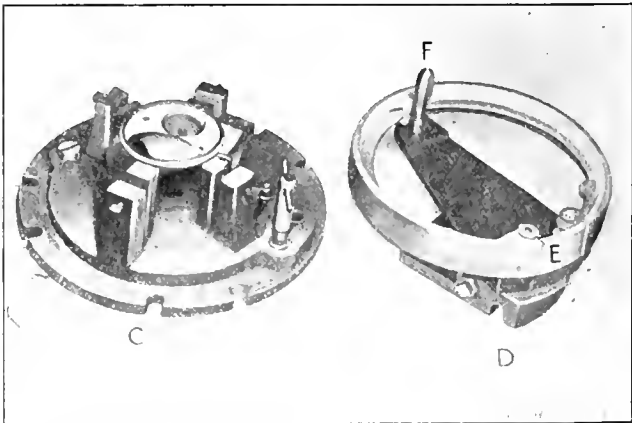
Fixtures used in Surfacing Part of Muffler and Cutting Brake Band
